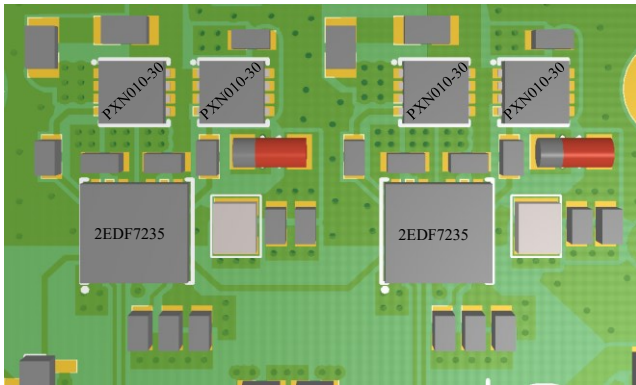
View of the switching transistors and their drivers (excerpt from the PCB layout design)
